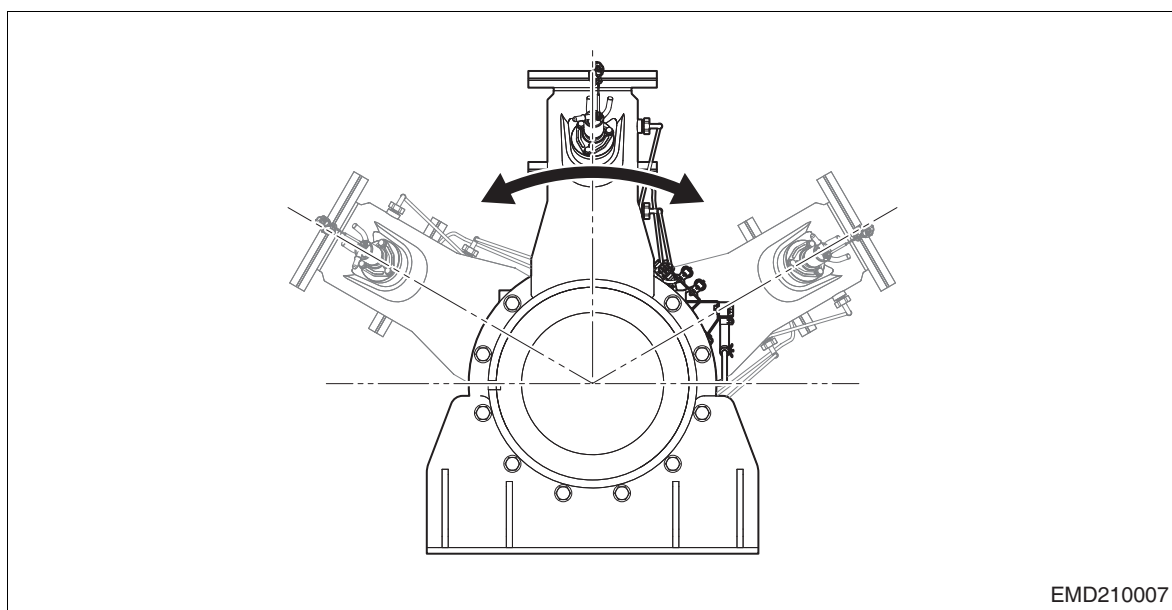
SCR Muffler' permissible Inlet/Outlet part rotation
